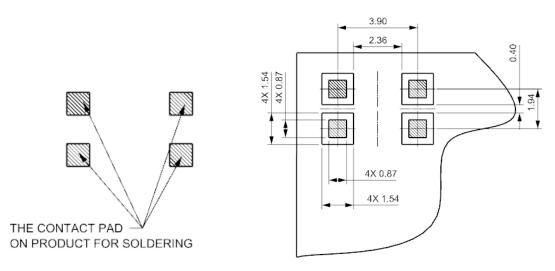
FOOTPRINT ON PCB FOR SOLDERING
